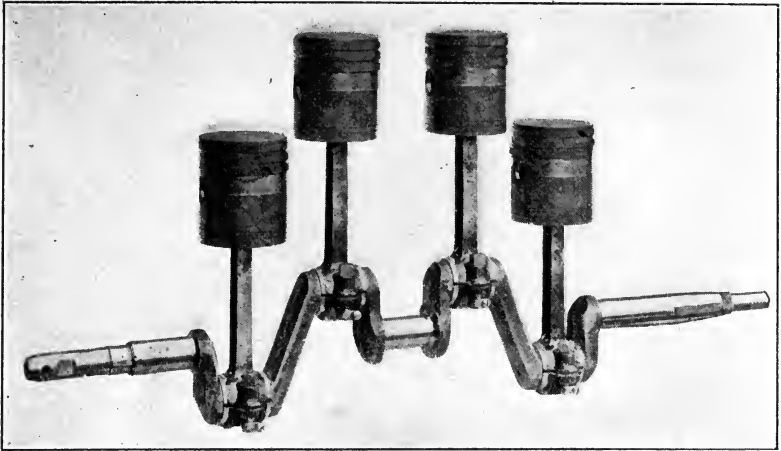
Crank Shaft, Piston and Connecting Rod Assembly Used in Reo Motors.
